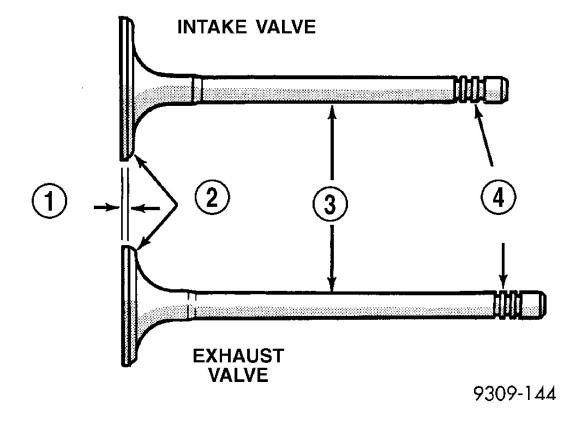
Intake & Exhaust Valves Courtesy of CHRYSLER LLC
